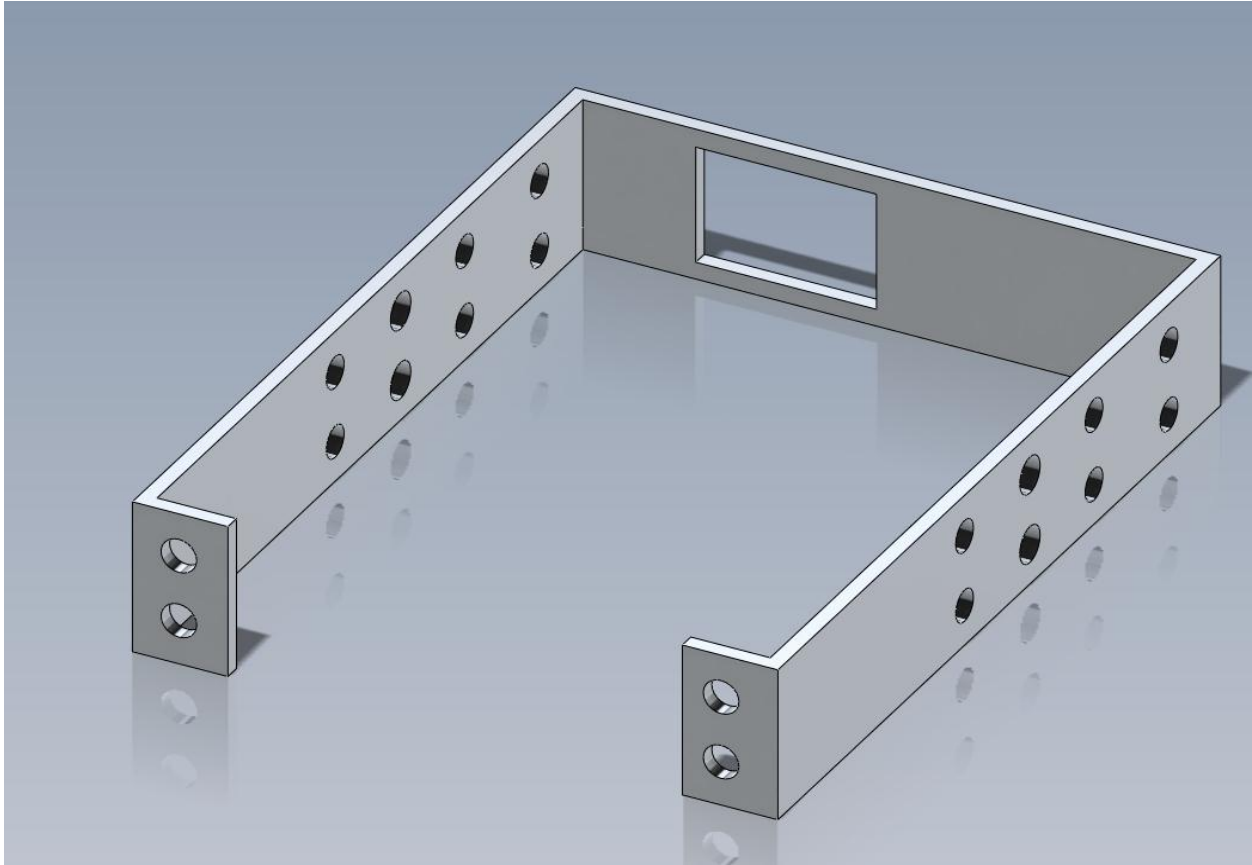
Hand Chassis to be bent from 1/16 inch plate stock
